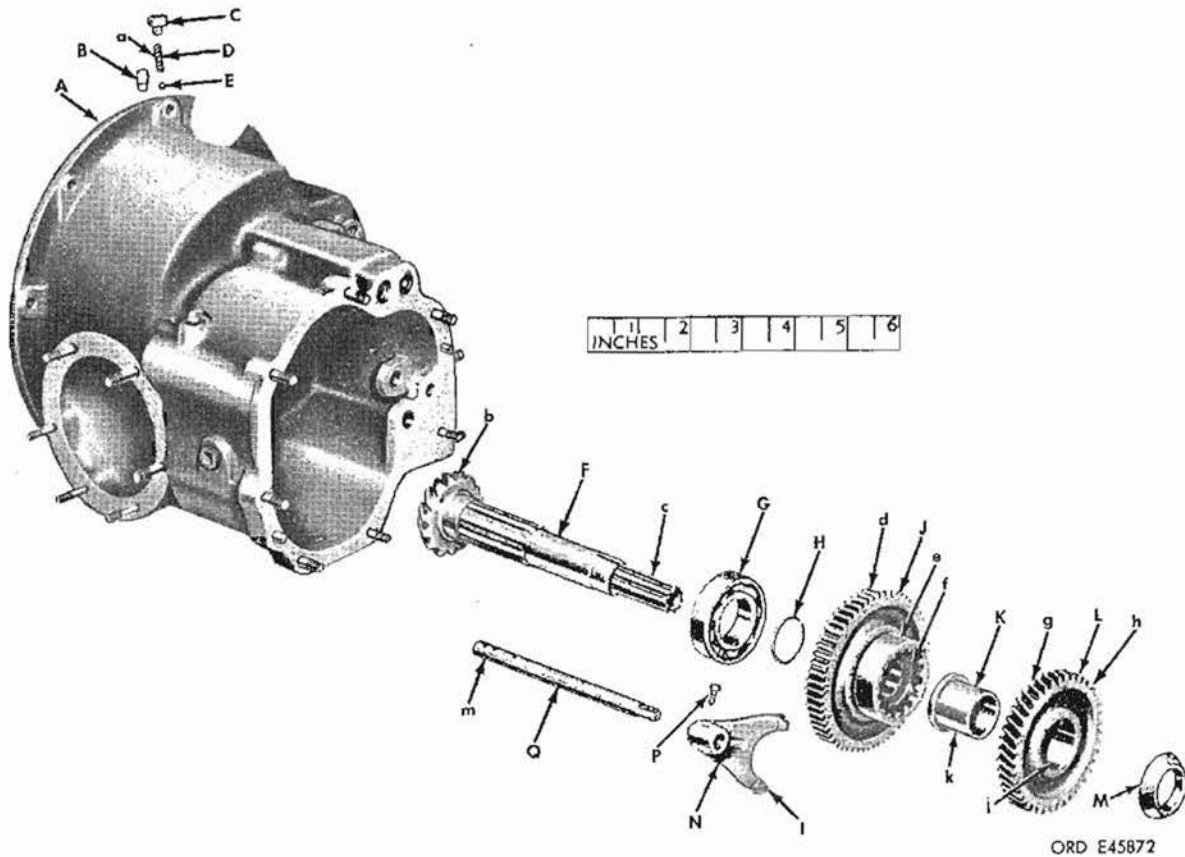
Bevel spur gearshaft, countershaft cluster gear, reverse idler spur gear, and related parts—exploded view.
